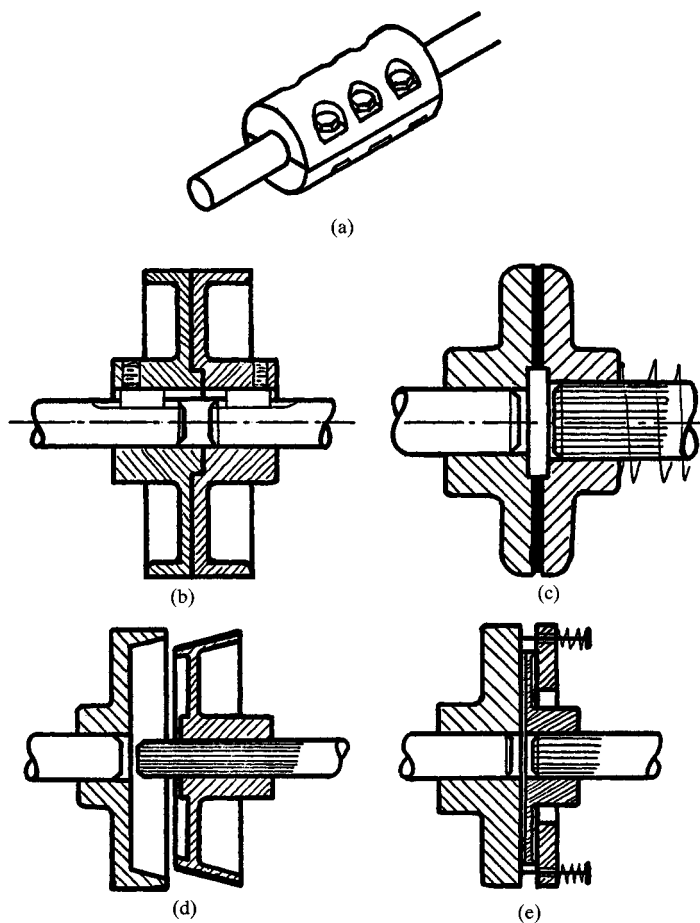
Couplings and connectors—axial. These are used to connect co-axial shafts. (a) Rigid coupling; (b) flanged coupling; (c) disk clutch; (d) cone clutch; (e) plate clutch.
